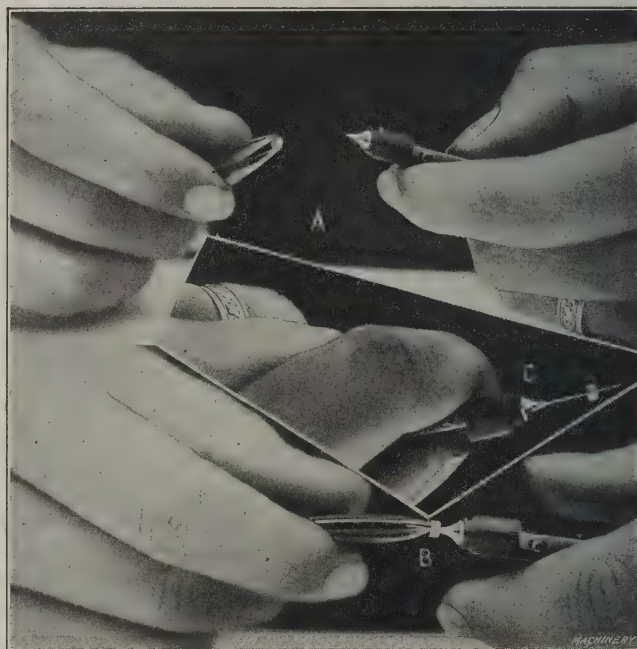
Gaging the Holes in Jewels by Means of a Needle Gage
